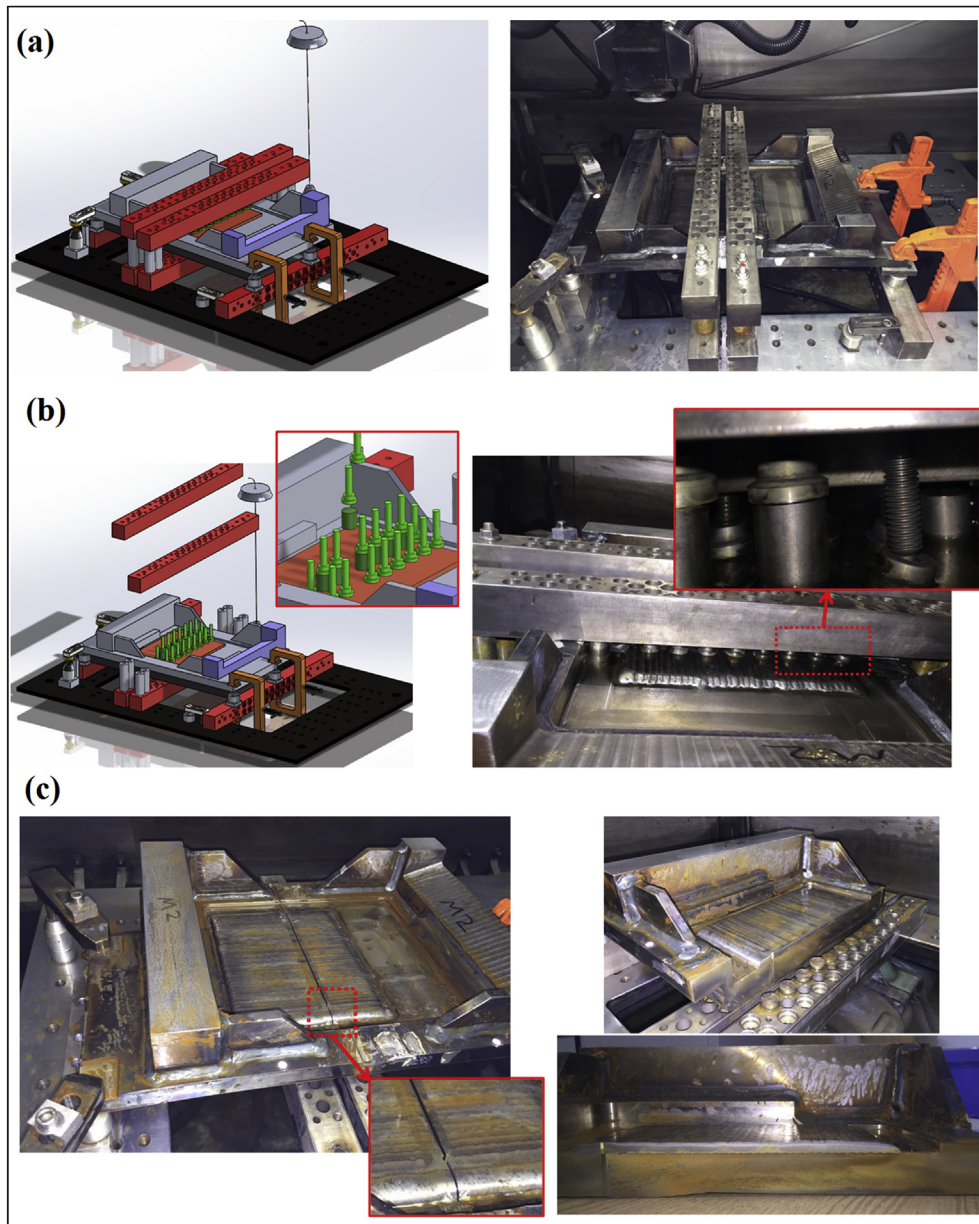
Set-up for restraint of test pieces during EDM cutting (a: simple clamping with G-clamps; b: customised restraint rig including flat-headed screws as well as bolts with ball-jointed ends, which can accommodate weld mock-ups with an uneven surface; c: cut surface).
